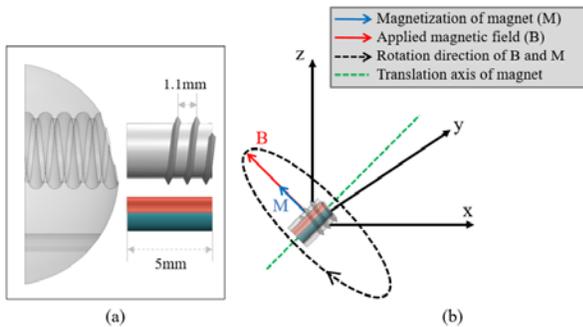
(a) Needle extrusion module components, (b) Actuation mechanism using rotation magnetic field.
